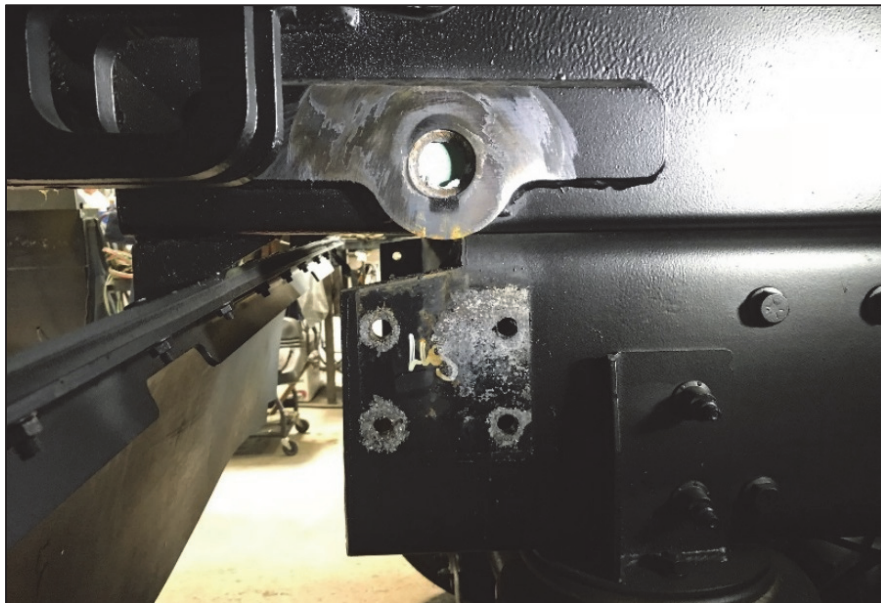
Lower Mounting Bracket Removed and Upper Mounting Weldment with Pin Removed
